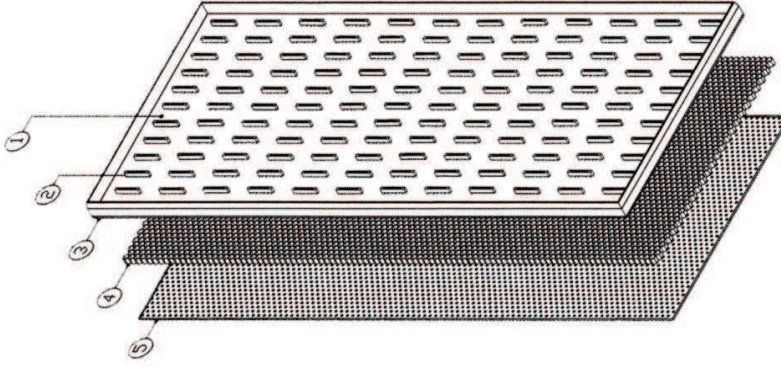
A Schematic layout showing components of unit module of PMD: (1) Top PCB, (2) 32-pin ETEC connectors, (3) edge frame, (4) honeycomb of 48×96 cells, (5) bottom PCB. Figure is adopted from [77].
